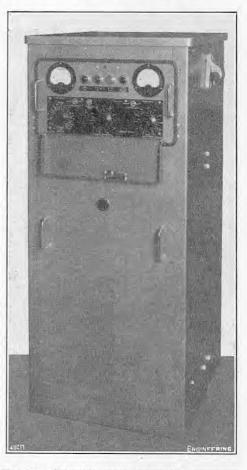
Spot-Welding Control Equipment; BRITISH THOMSON-HOUSTON COMPANY, LIMITED.
